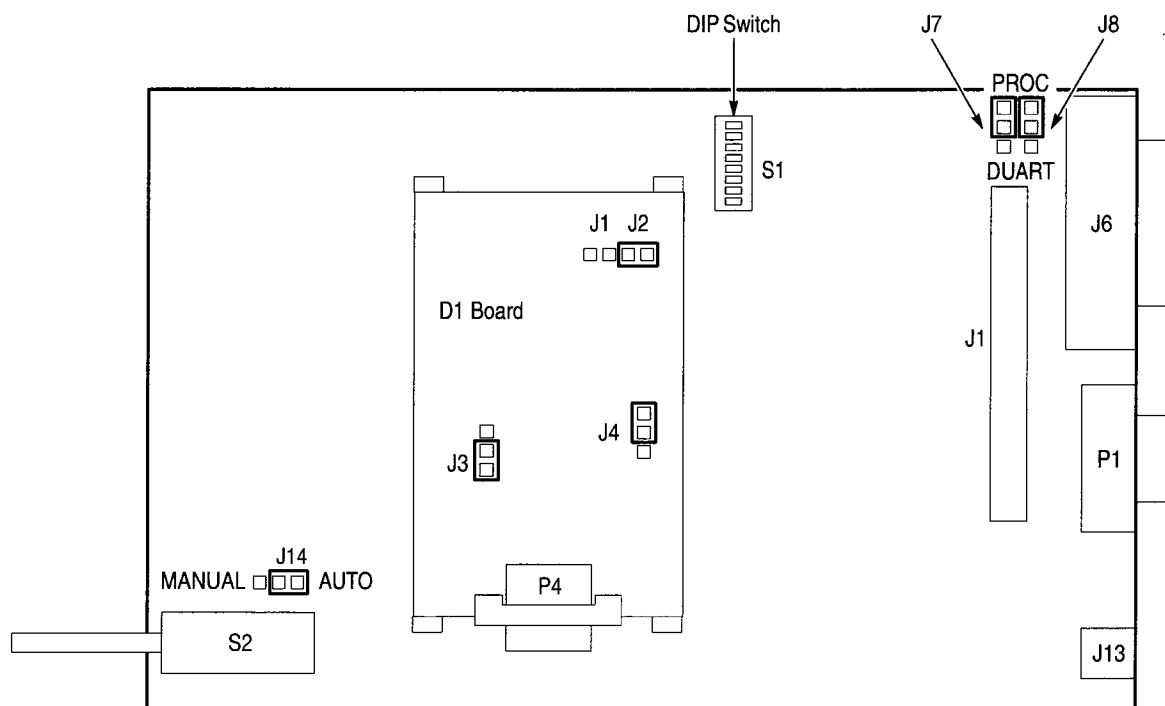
Locations of Jumpers and DIP Switches with DI Board
